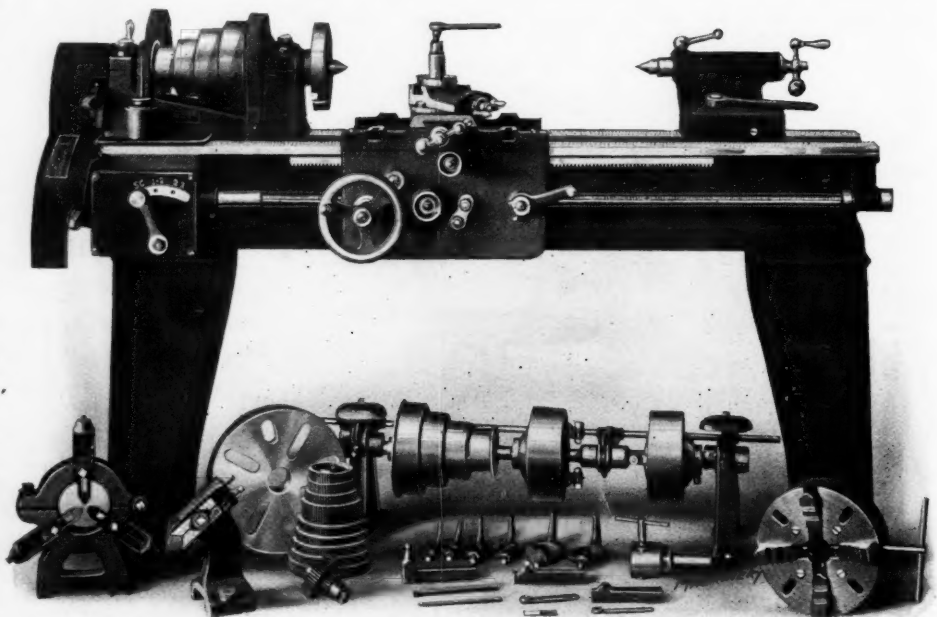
Carroll-Jamieson 13-inch Back-geared Screw-cutting Lathe
